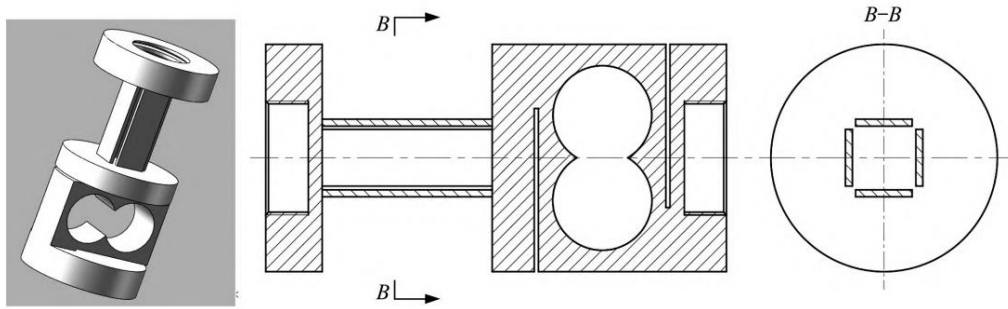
Cantilever type double hole parallel beam elastic structure [14]
